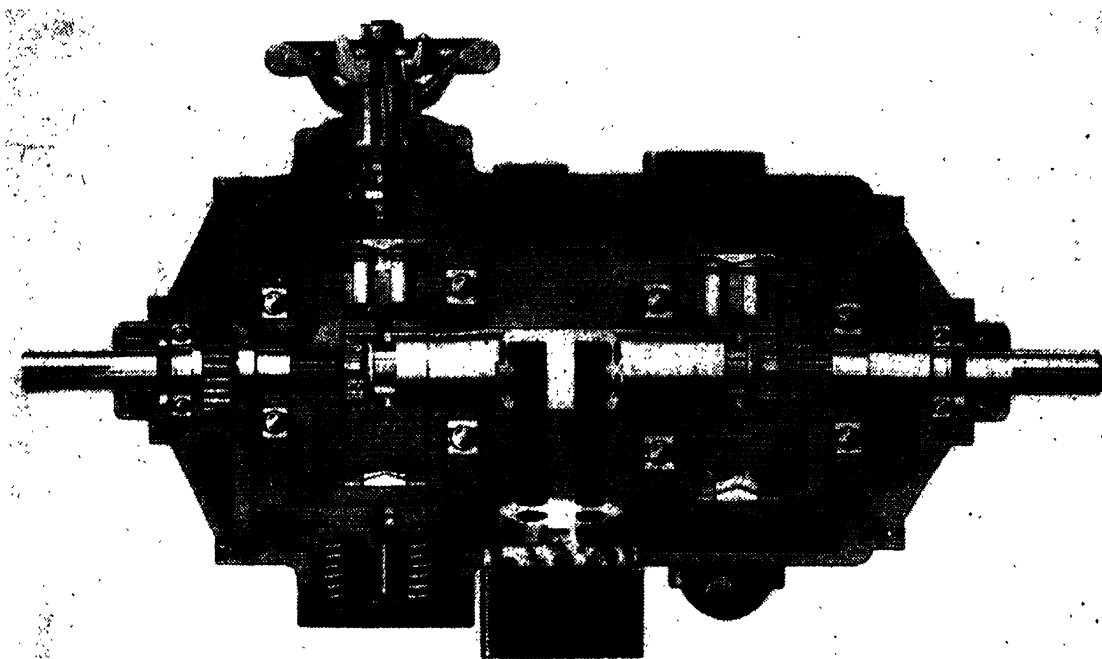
Oilgear integral hydraulic transmission. (*The Oilgear Co., Milwaukee, Wis.*)
